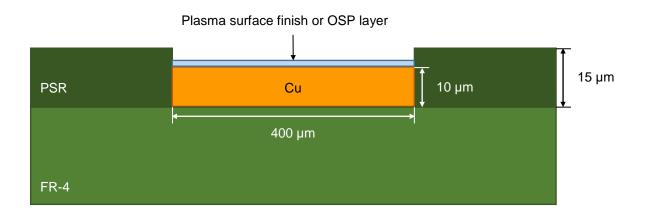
Schematic illustration of the test samples used in this study, showing the FR-4 PCB, photo solder resist (PSR), Cu pads, and surface finish layers.
